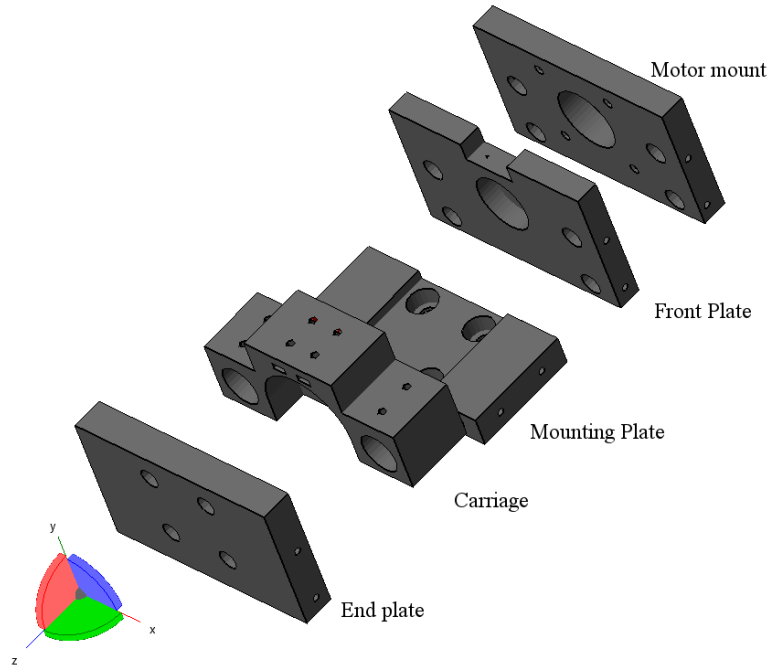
OpenSCAD rendering of 3d printed pieces of linear stage. Hardware such as motors, screws, rails, and bearings are not included.
